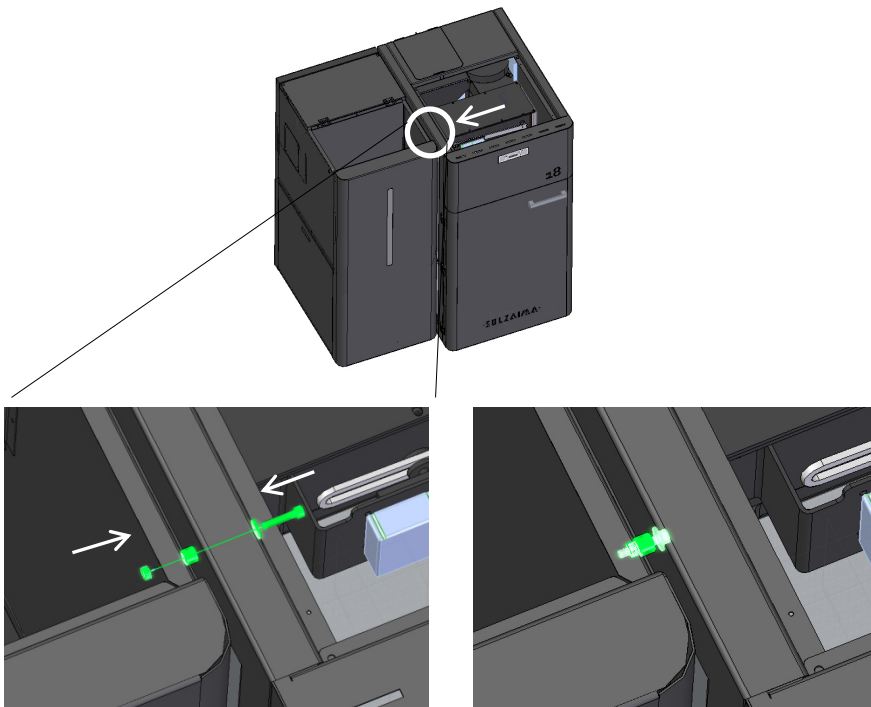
Attaching and securing the storage unit to the boiler, on the side
